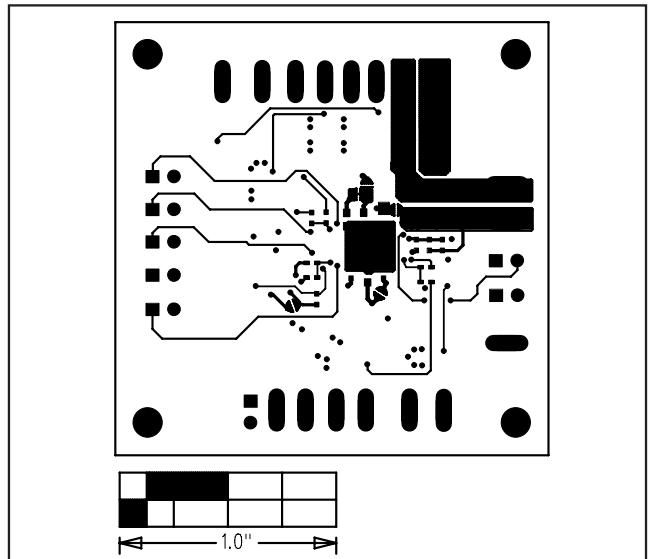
MAX8680 EV Kit PCB Layout—Bottom Layer
